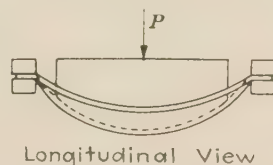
FORMING OF DOUBLE CONCAVE PART
